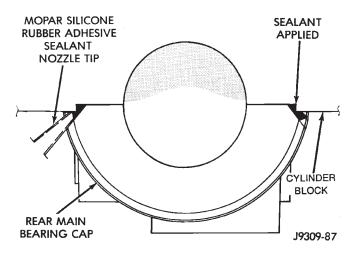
Apply Sealant to Bearing Cap to Block Joint
